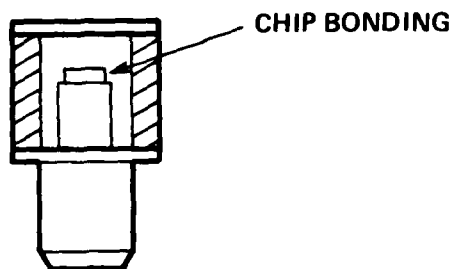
CERAMIC PILL PACKAGE ASSEMBLY WITH BRAZING ALLOY
